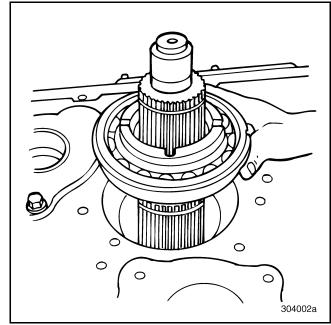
Installing Front Mainshaft Rear Bearing (T313LR/T318LR Shown)
